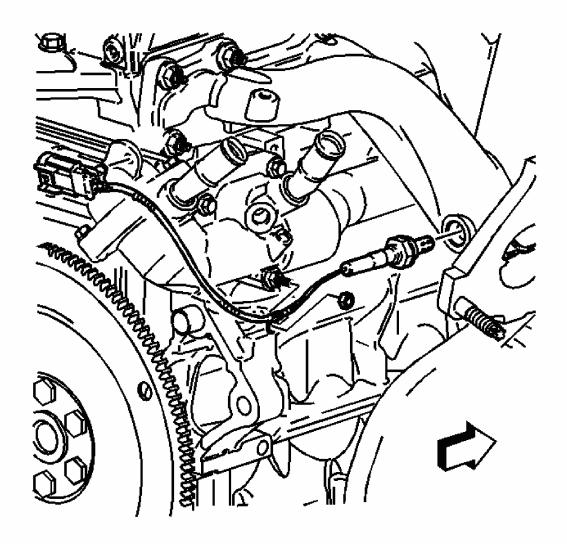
Oxygen Sensor & Harness Connector Courtesy of GENERAL MOTORS CORP.
